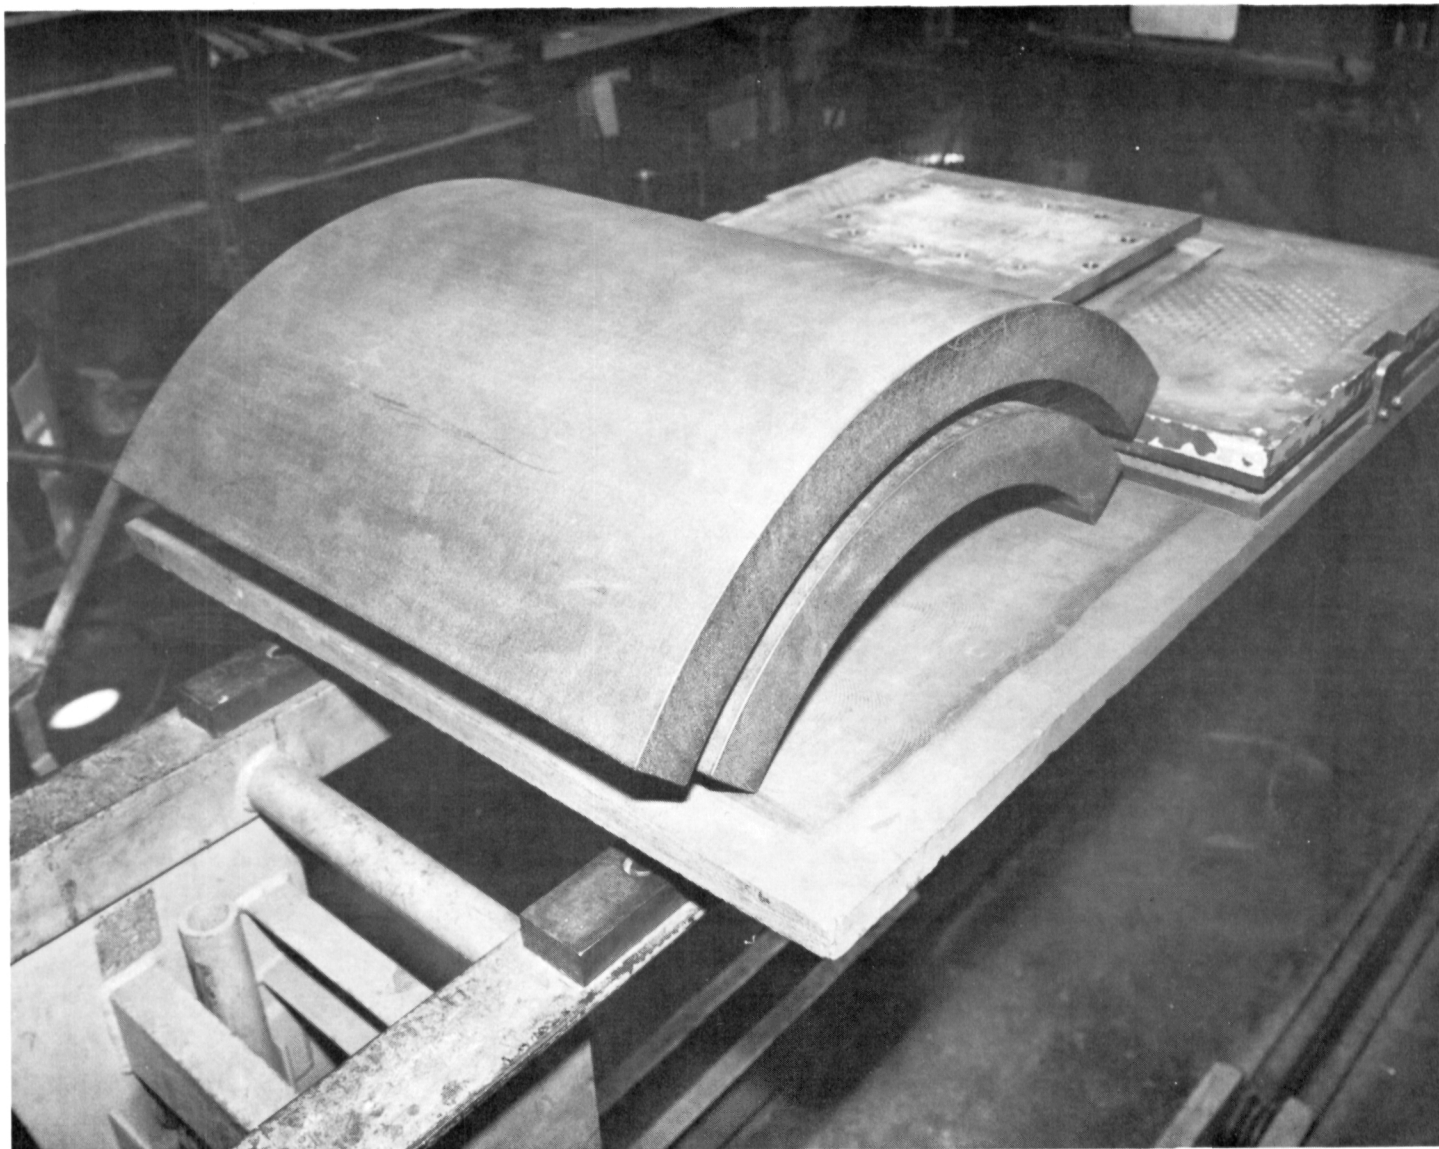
The Assembly Ready for Placing into Vacuum Furnace
